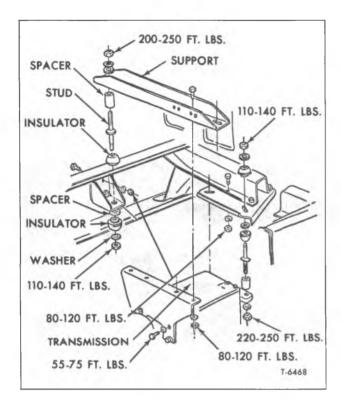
Auxiliary Transmission Mounting (Spicer 6041)
